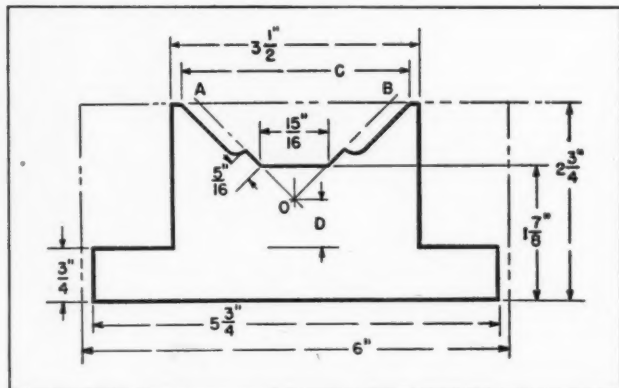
End View of Guide for Motor-generator Milled from Bar Stock
